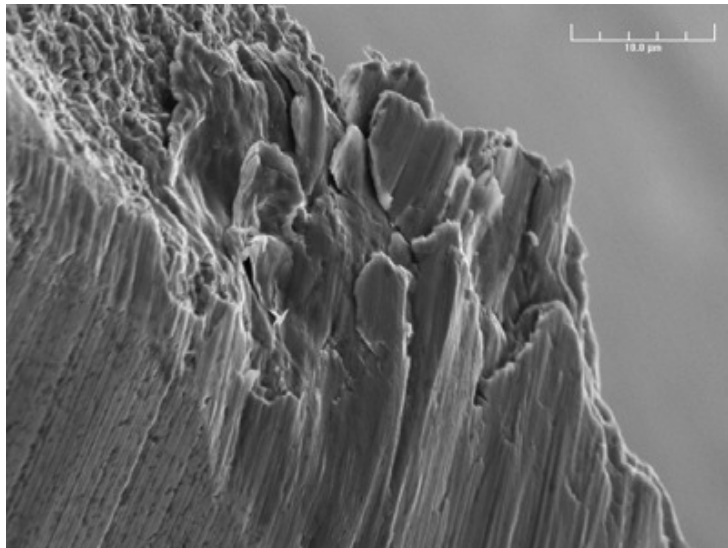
Scanning electron pictures of chipping and plastic deformation of a cutting tool (dry machining, machining time: 83s, cutting speed: 0.30 m/s).
